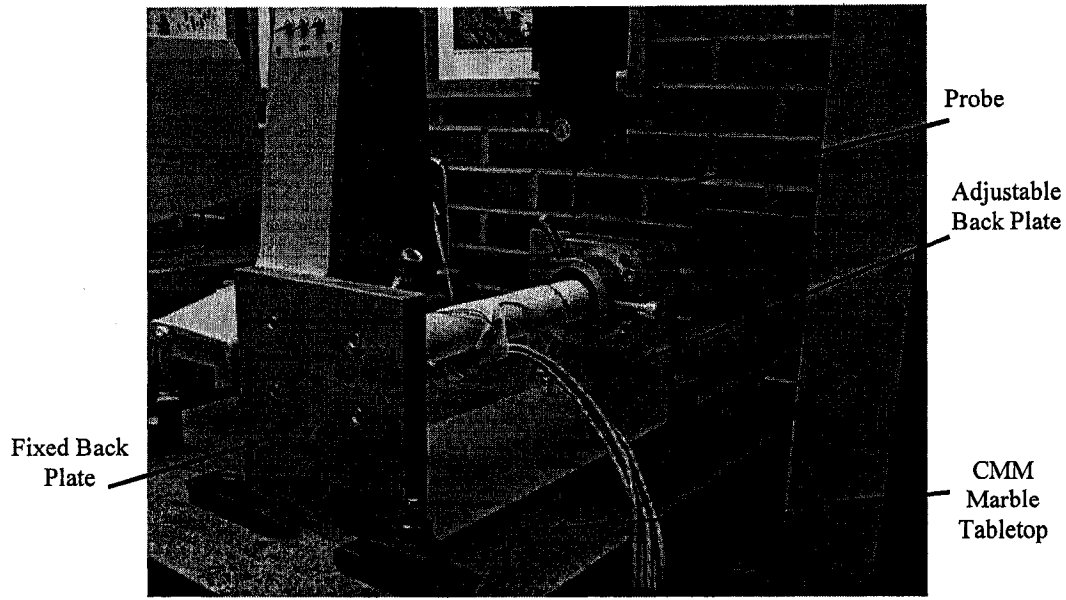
Alignment jig with PVC specimen mounted in place in CMM
